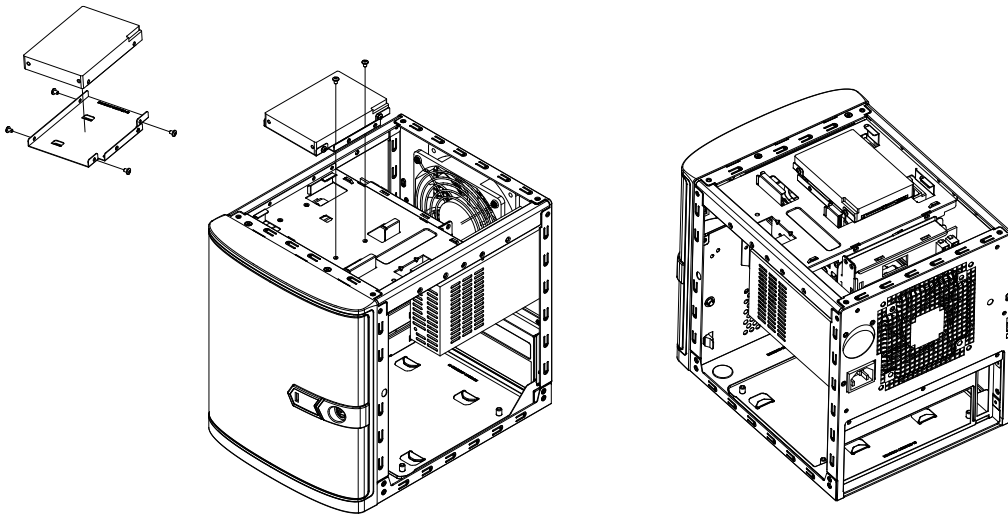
Installing a Top-Mounted Fixed Hard Drive
